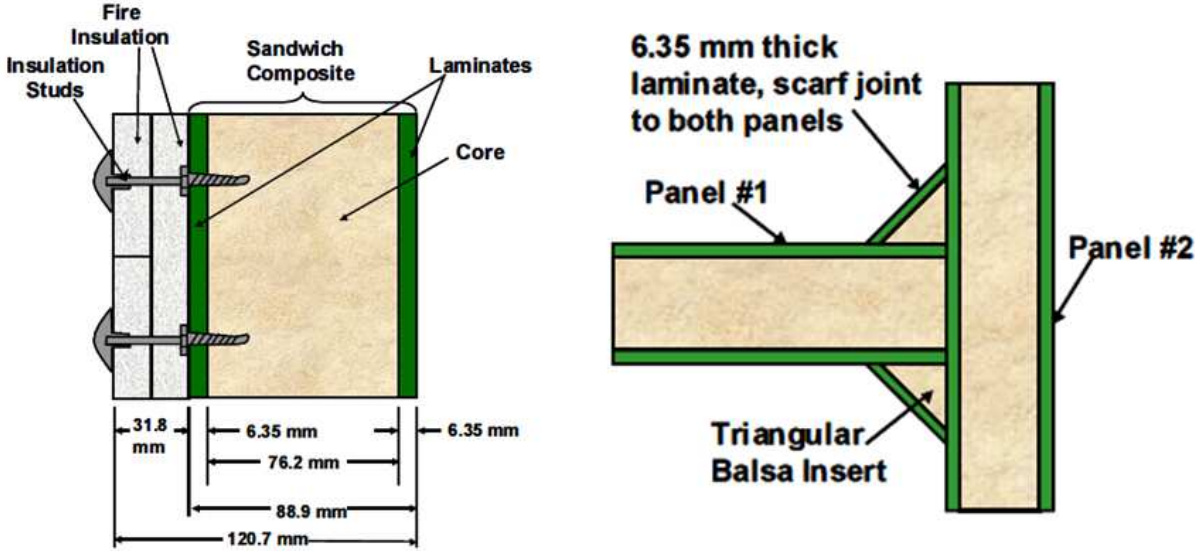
The tested FRP composite's construction, with insulation fastening and a T-joint (Lattimer, Oulette, & Sorathia, 2004).
